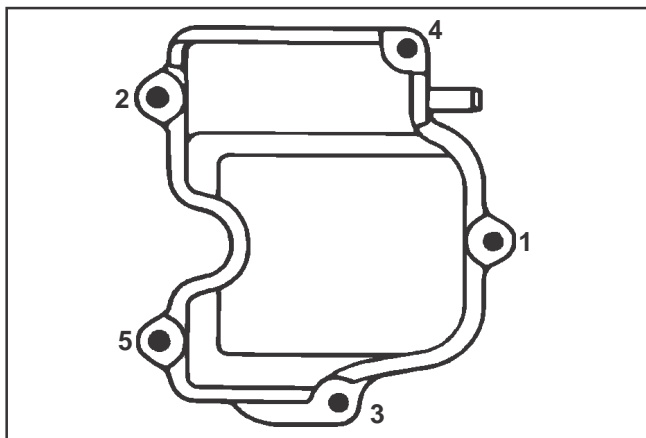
Installing Valve Cover. (Die Cast/ Aluminum Cover Shown).
